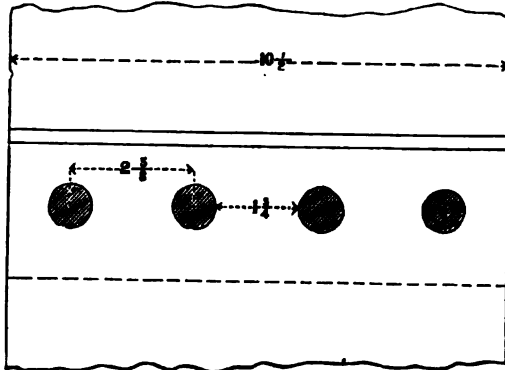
Single-Riveted Lap Seam. Scale  $\frac{1}{4}$  in.—1 in.
